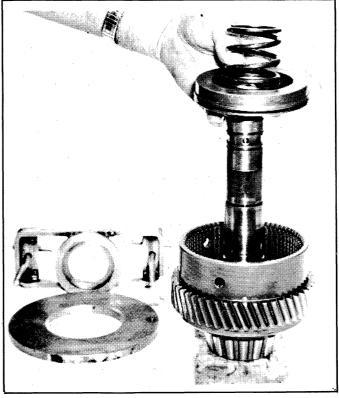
Removing or Installing Clutch Piston and Return Spring.
